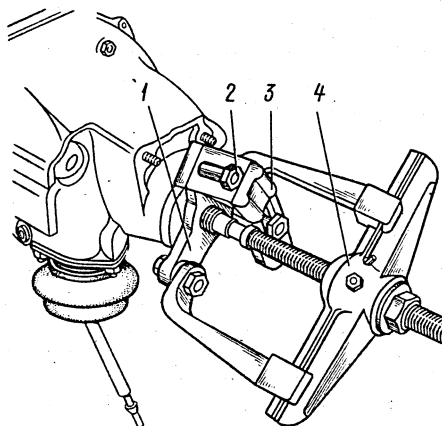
Removing the Flexible Coupling Flange with Remover Tool A.40005/3/9B/9C:
